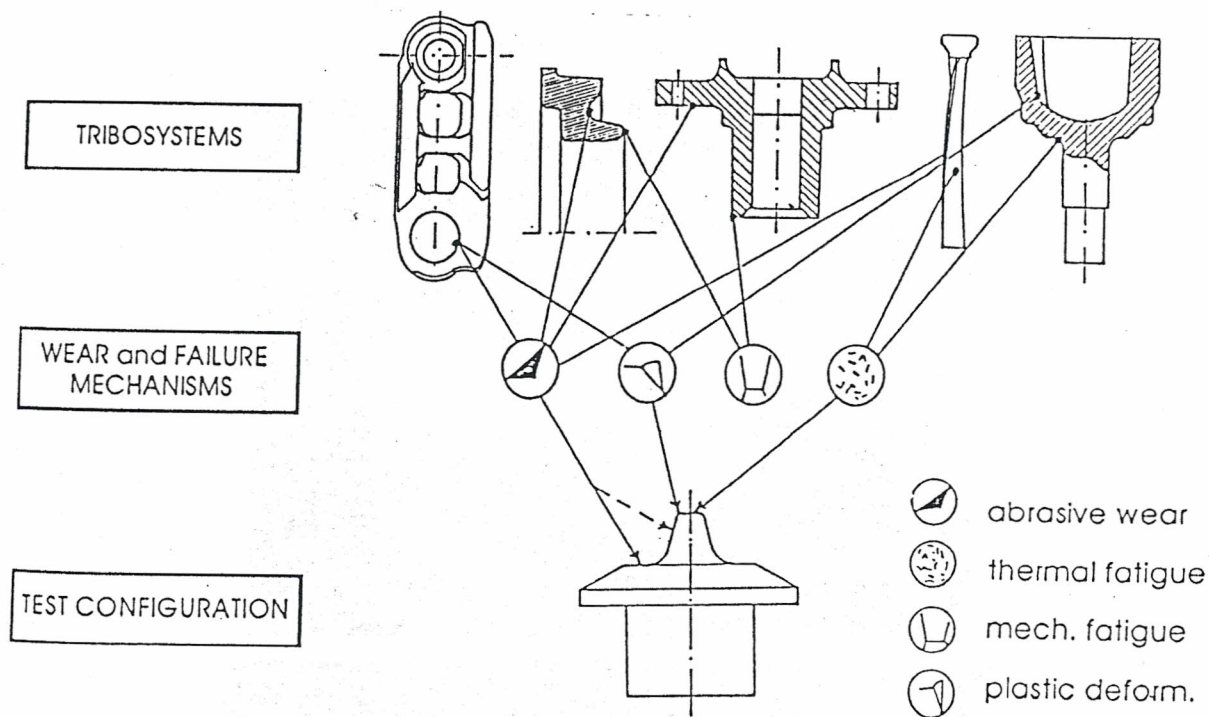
Tribosystems, wear and failure mechanisms and test configuration
